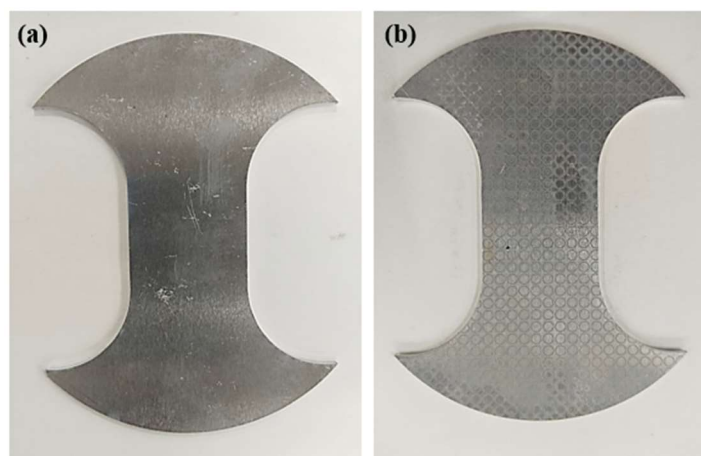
Clad specimen (a) before, and (b) after laser marking
